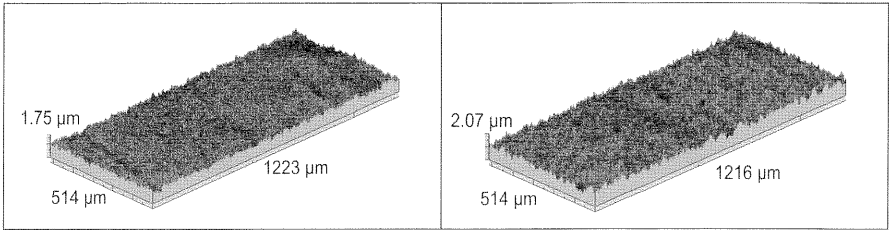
Surface topographies after glass bead peening at 1.5 (left) and 4 bar (right)
